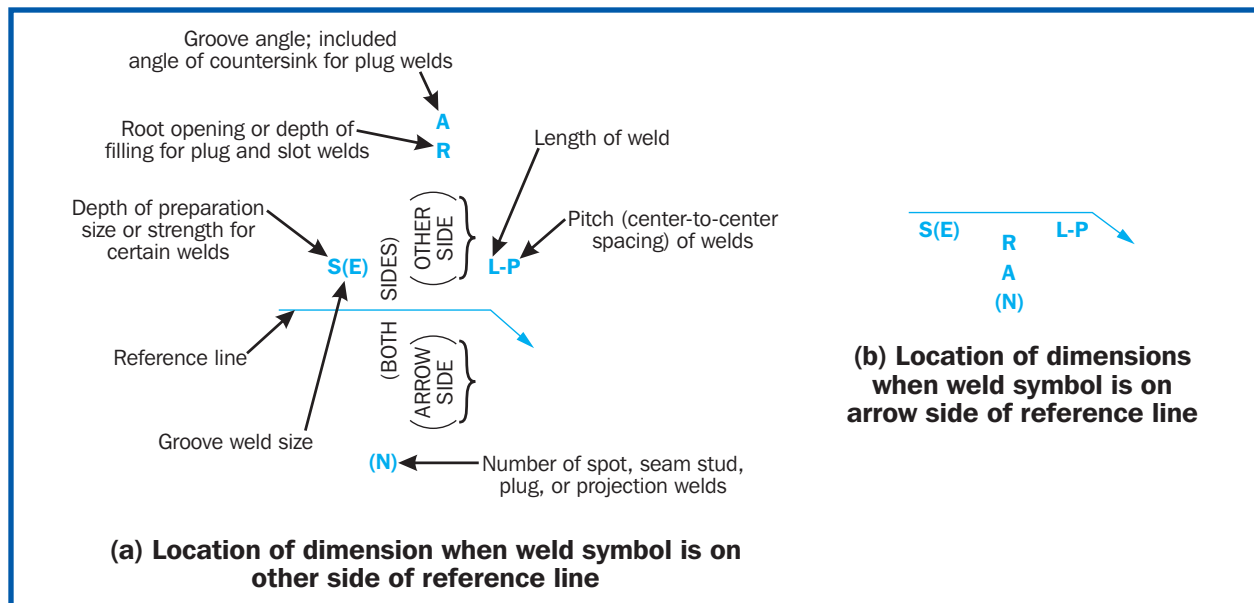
There are several locations for dimensions on the welding symbol. Once you are more familiar with the location of supplemental information, you will see that the dimension location aligns with the symbols or abbreviations it references. (Courtesy, Shanghai Jiao Tong University, Shanghai, China)
